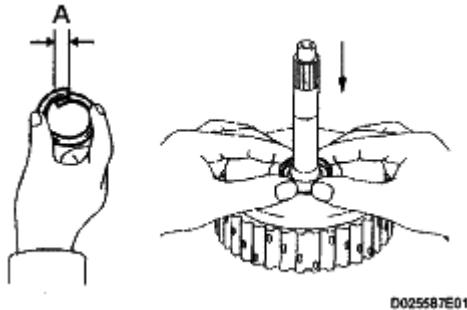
Compressing Input Shaft Oil Seal Ring From Both Sides To Reduce Dimension
